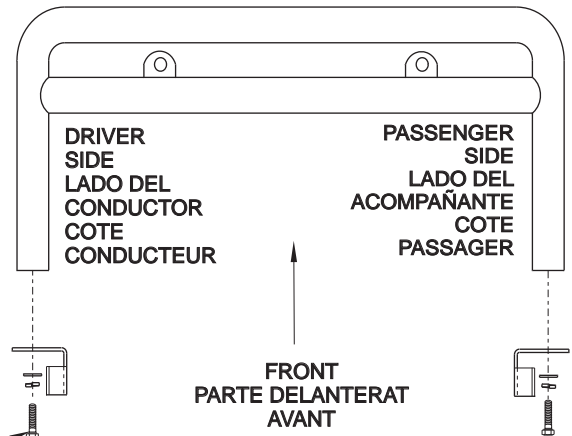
INSTALLATION VIEW OF DRIVER SIDE SHOWN
